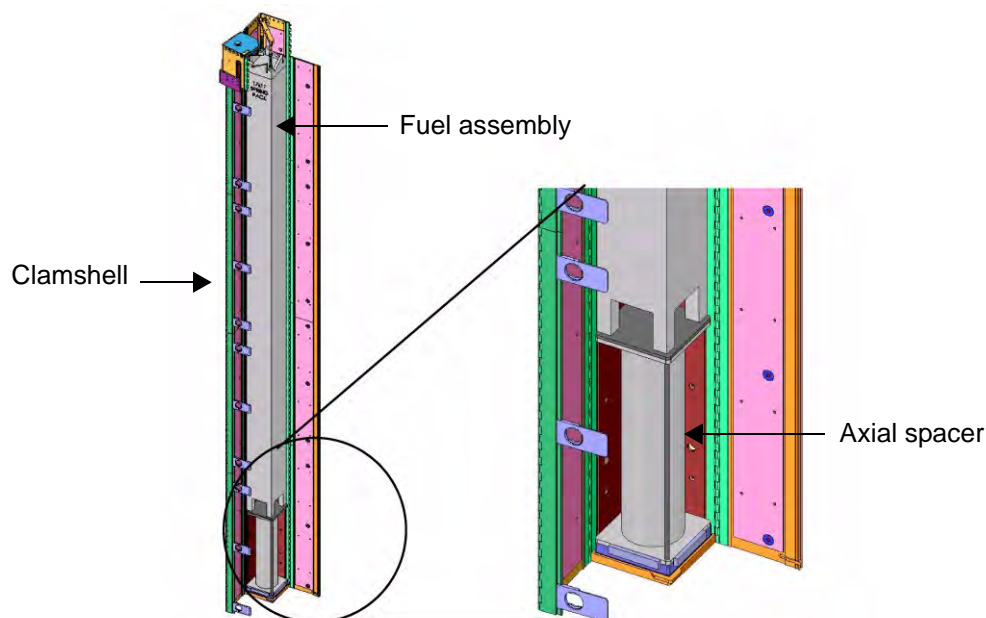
Axial Spacer below Fuel Assembly in Traveller XL Clamshell
